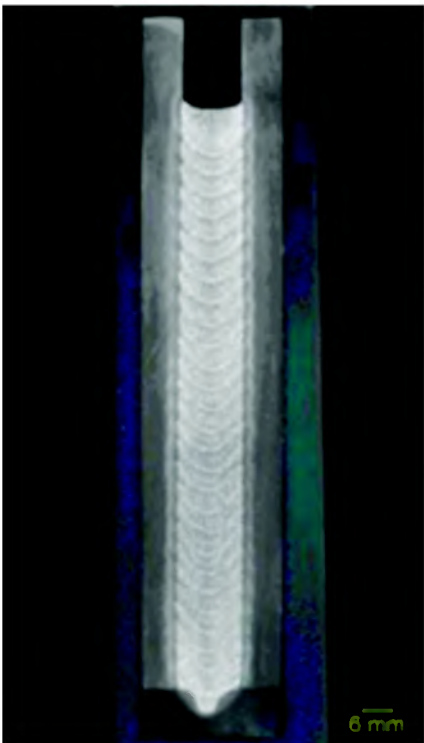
Weld joint of a narrow-groove T-GMAW.
